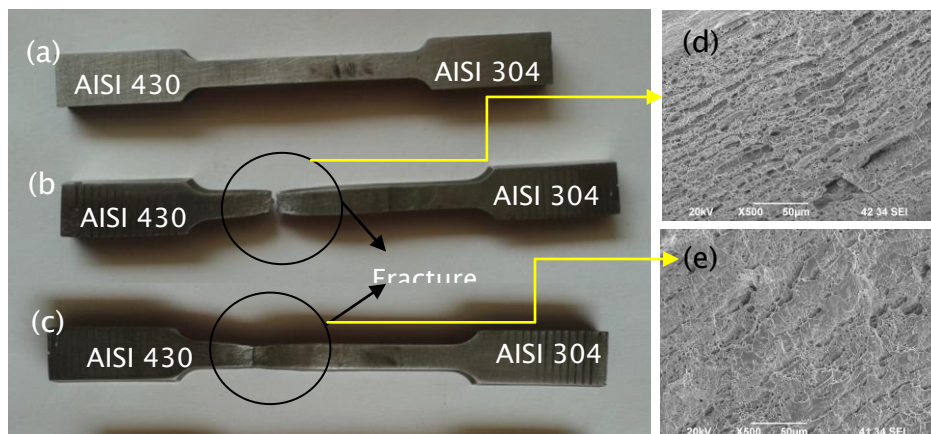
Tensile studies on the dissimilar weldments (a) ASTM E8 Sample (b) Fractured samples of GTA weldments (c) Fractured samples of PCGTA weldments; SEM fractographs of (d) GTA weld sample (e) PCGTA weld sample
